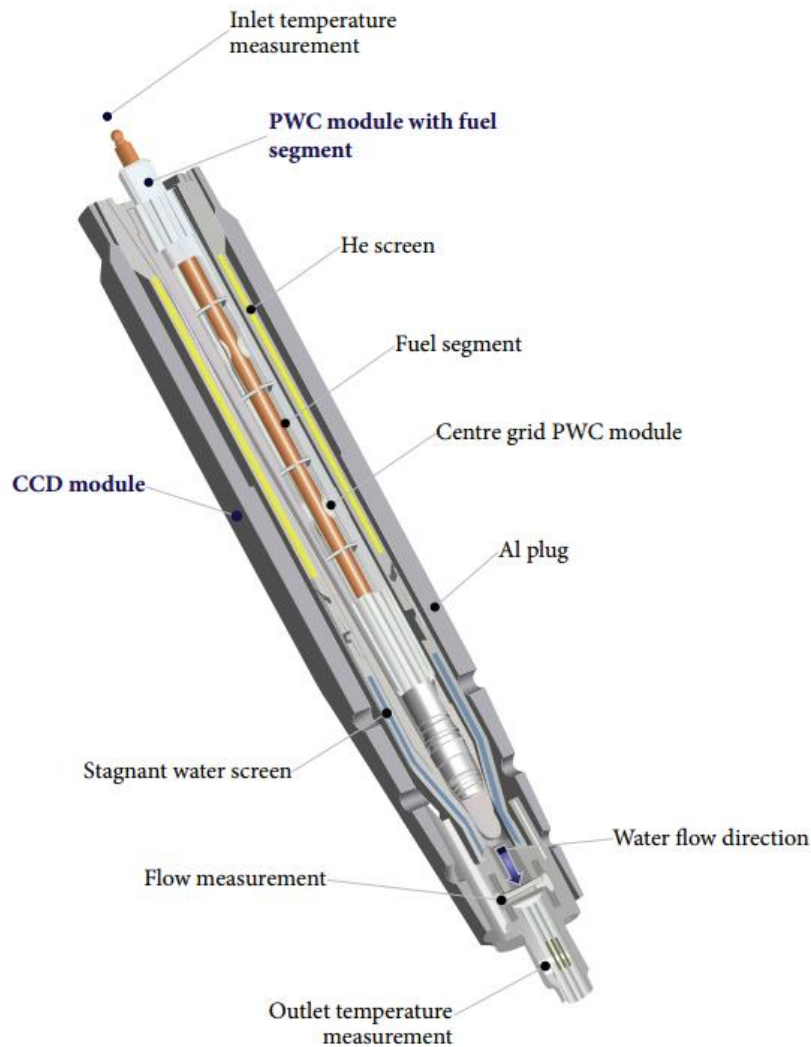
Global view of PWC/CCD assembly [Mou07,Eyn09a]
